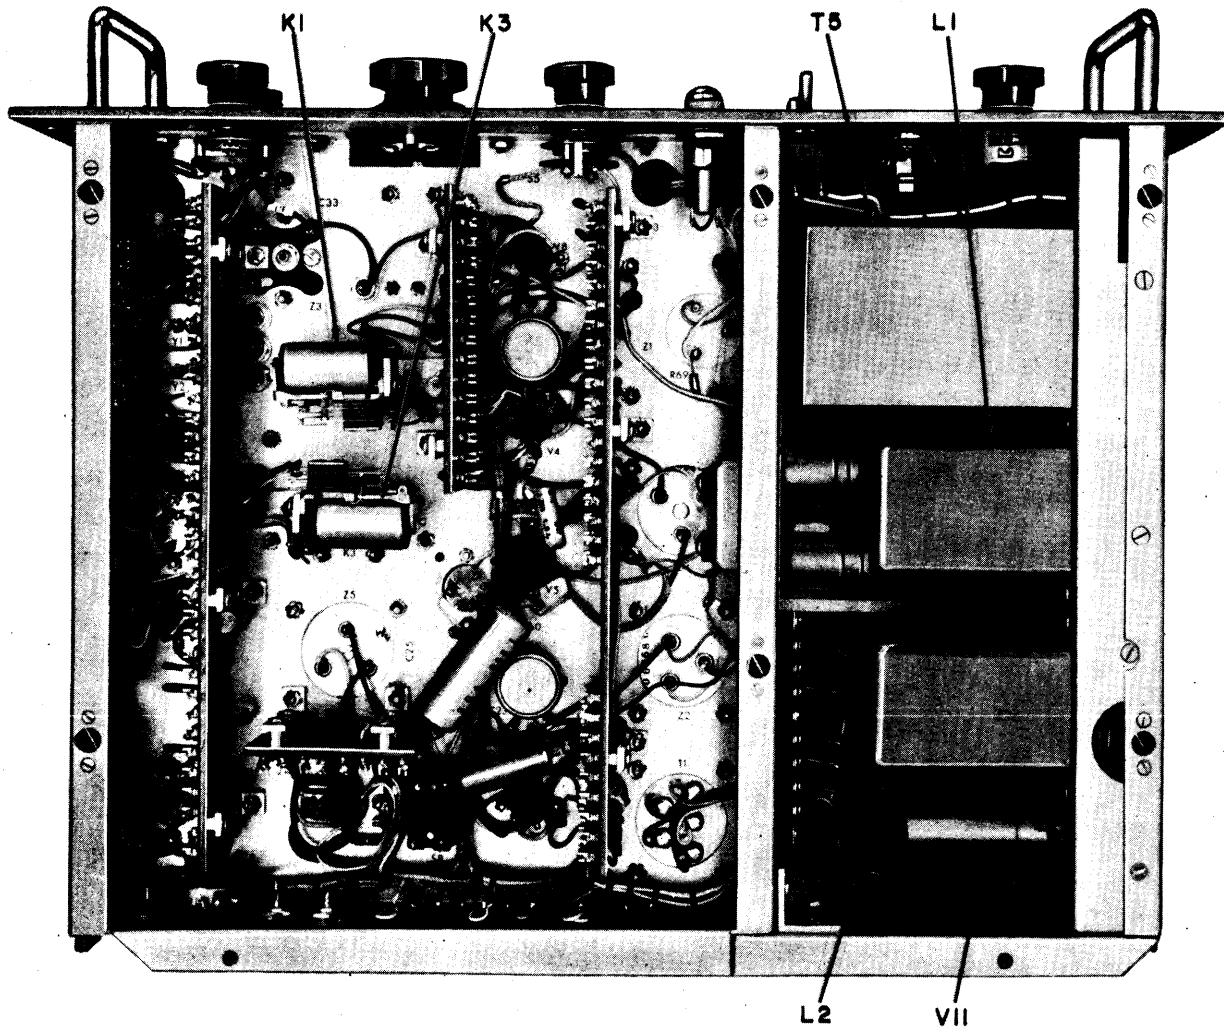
b. Location of Major Electronic Components, MSR-6B, Bottom View
